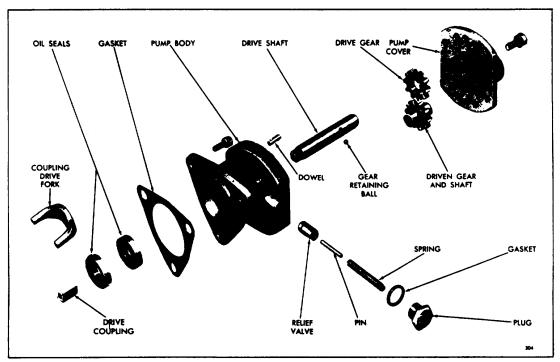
Fuel Pump Details and Relative Location of Parts (Right Hand Pump Shown)
